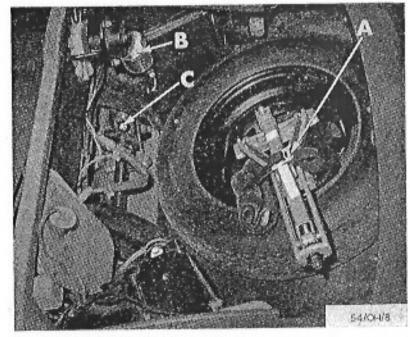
A—Correct jack stowage B—Brake master cylinder reservoir C—Steering rack lubrication plug
